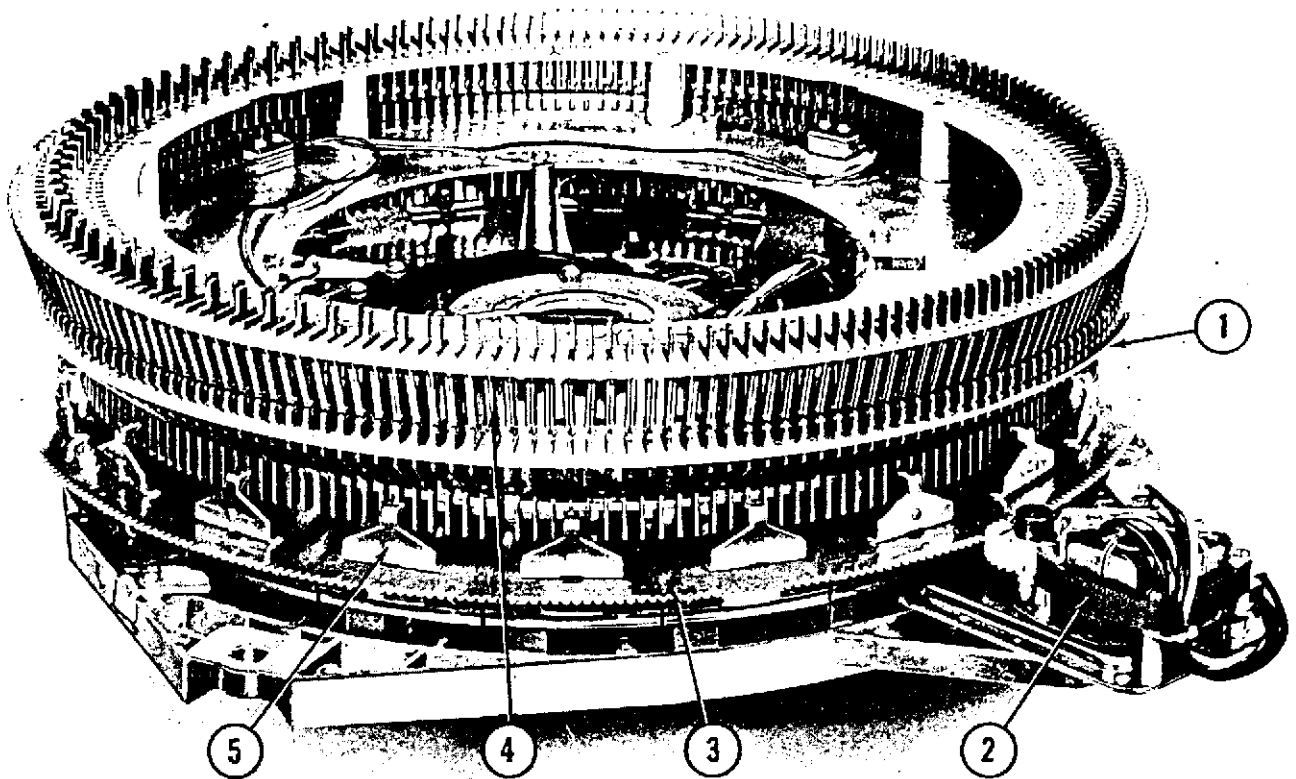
ELECTRIC SELECTOR ASSEMBLY
